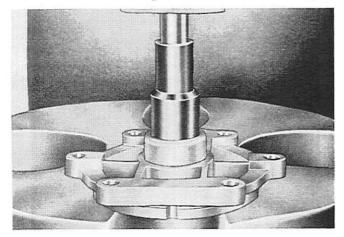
Removing Roller Bearing from Crankcase Bottom Page 6 Master Service Manual
